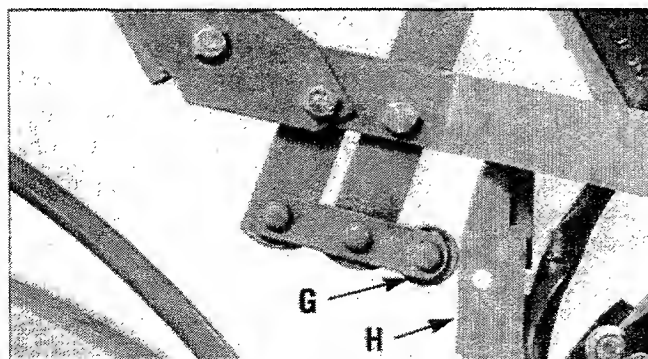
C: When the Wheels/Tines/PTO Drive Lever is held up in the REVERSE position, the clutch roller (G) must be located higher on the face of the adjustment block (H).
